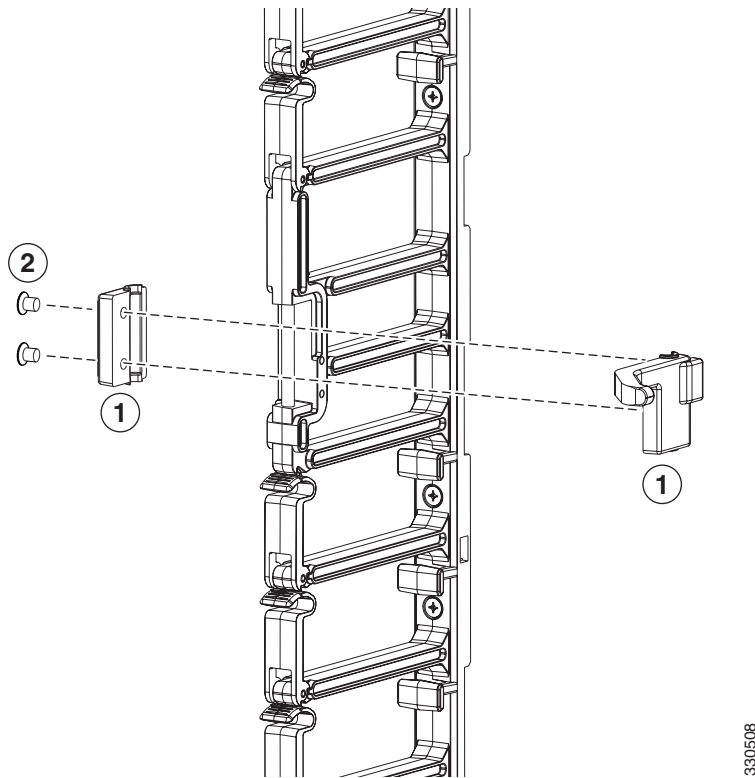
Removing the Bottom Hinge Bracket from the Chassis
